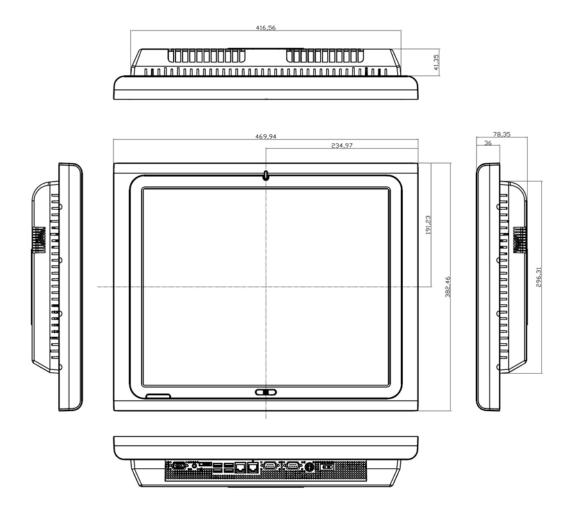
AFL-19B-915 Front Dimensions (units in mm)
